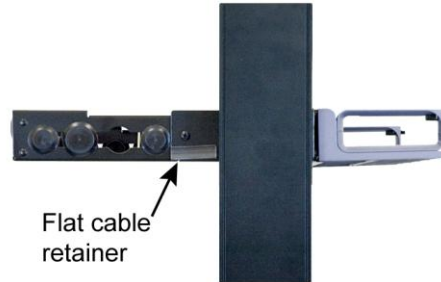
Installing the Flat Cable Retainer on the Outside of the Shelf
